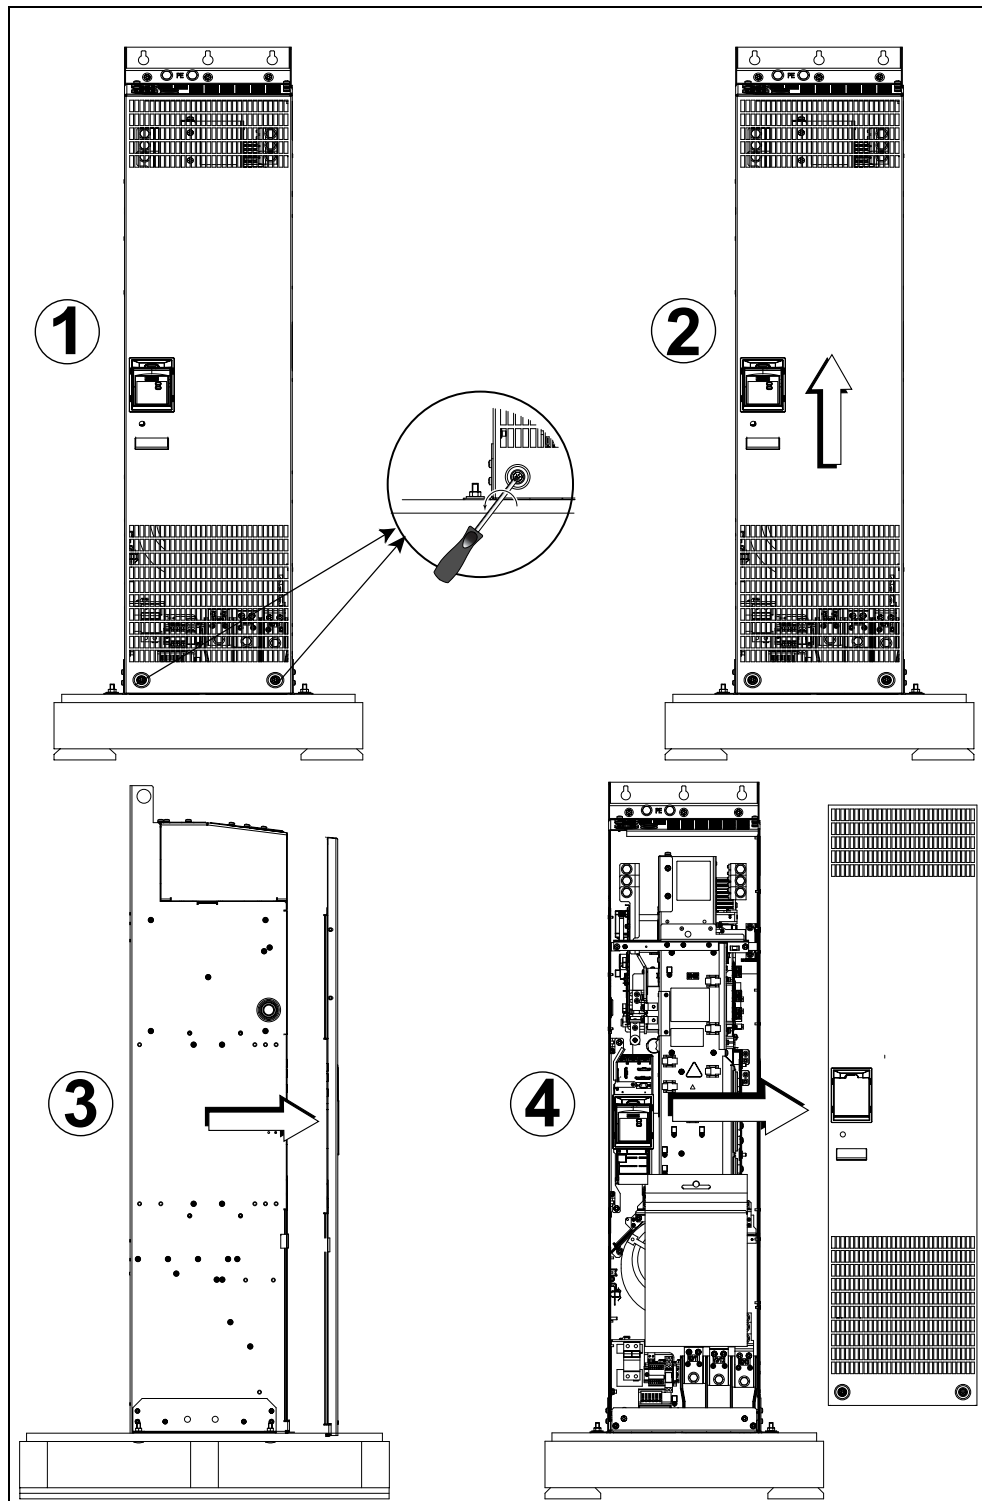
Removing front covers (Frame Sizes FX and GX)
